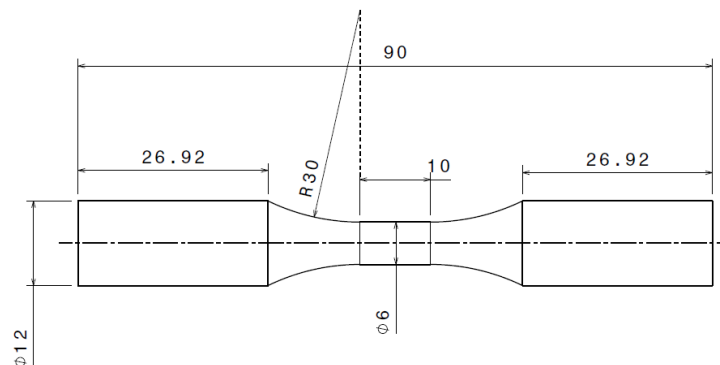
Geometry of fatigue specimen (dimensions in mm).
